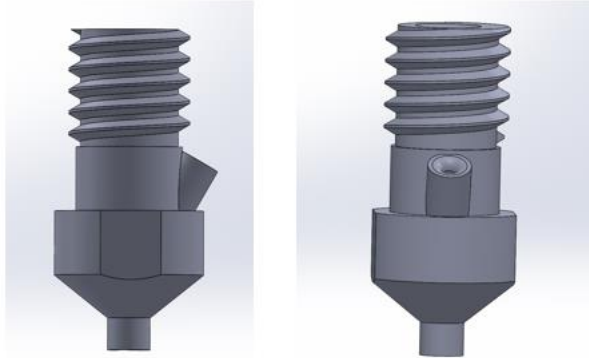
CAD model of nozzle design for co-extrusion of continuous fiber and polymer filament.
